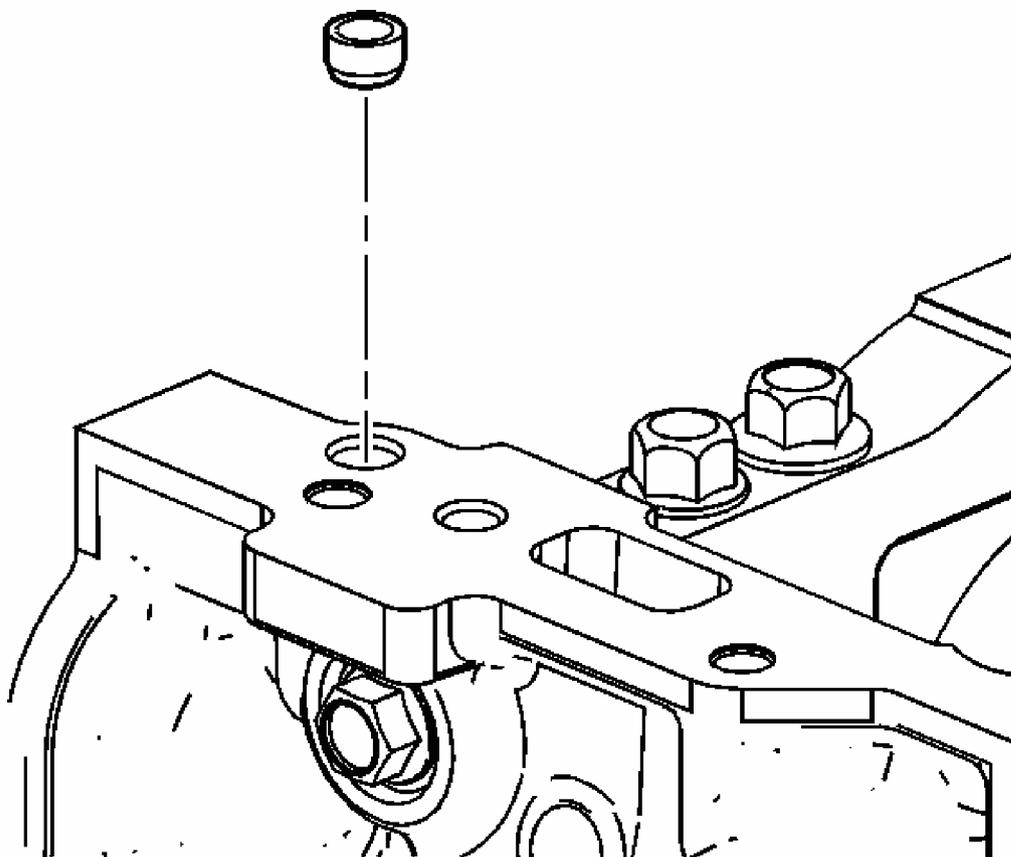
Locating Right Front Oil Pan Rail Oil Gallery Expansion Plug
